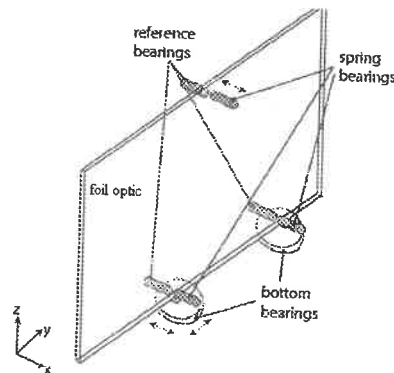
Two sets of air bearings, top and bottom, are used to kinematically constrain foil optics. The top set is divided into reference and spring bearings, which are exaggerated in size for clarity.
